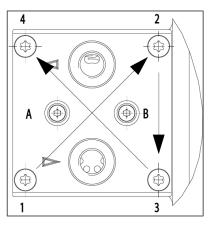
Tighten cap head screws (head plate shown as an example (screws (A) and (B) only in N87TTE design))
